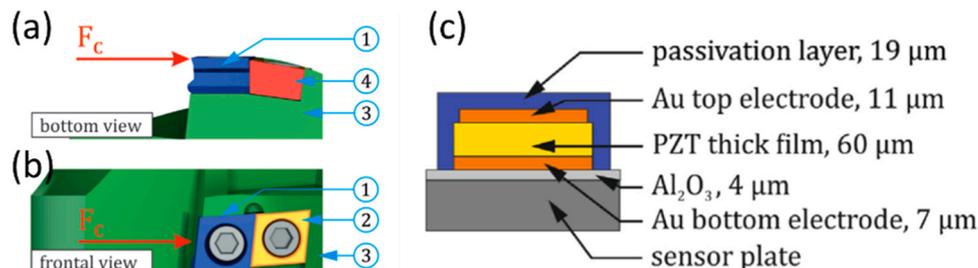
Indexable cutting head with a piezoelectric thick film sensor adjacently mounted below an insert [118]: (a) bottom and (b) front view of the sensor consisting of (1) insert, (2) piezoceramic thick film, (3) milling tool, and (4) sensor plate; (c) layers of the sensor.
